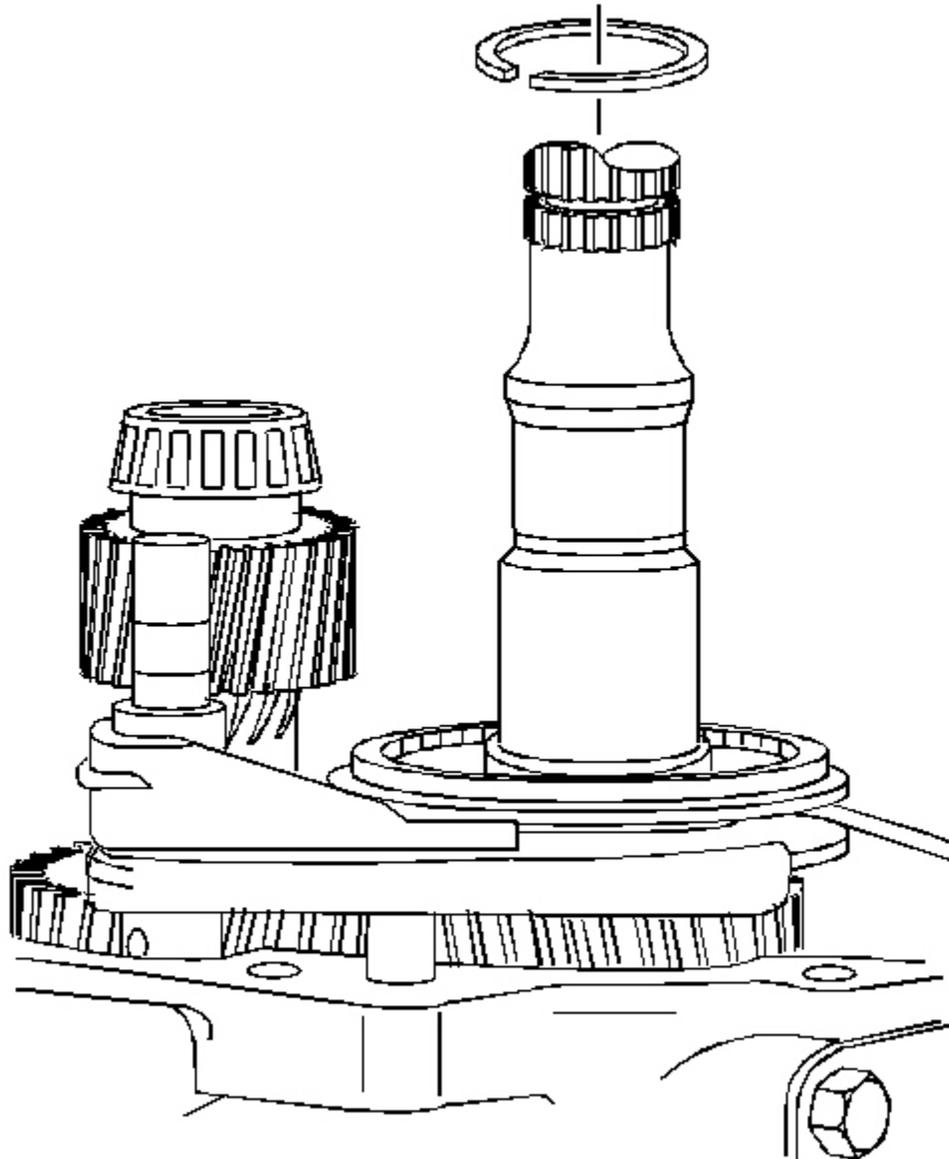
View Of Reverse Synchronizer Retainer Ring
